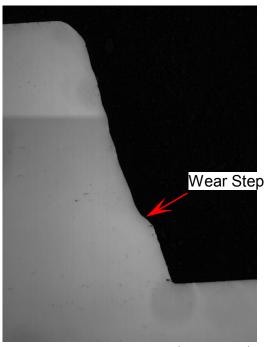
A optical comparator view of the step in the upper thread flank of the screw. Actual thread is dark. (Screw s/n DCA110(a))
